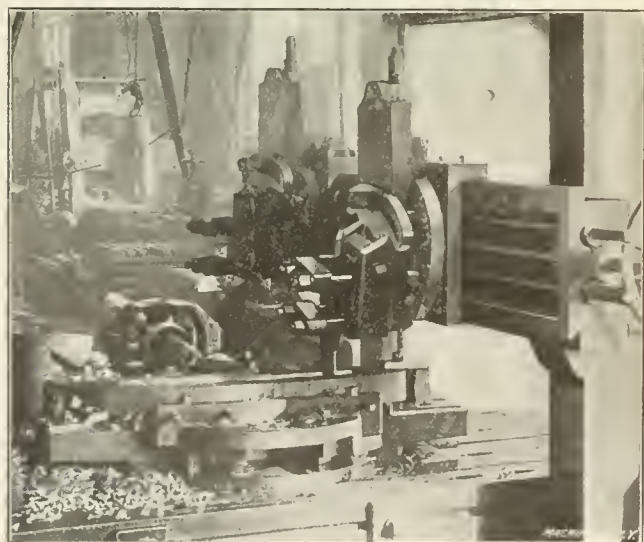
Radius Planing Attachment for Machining Links, etc.
